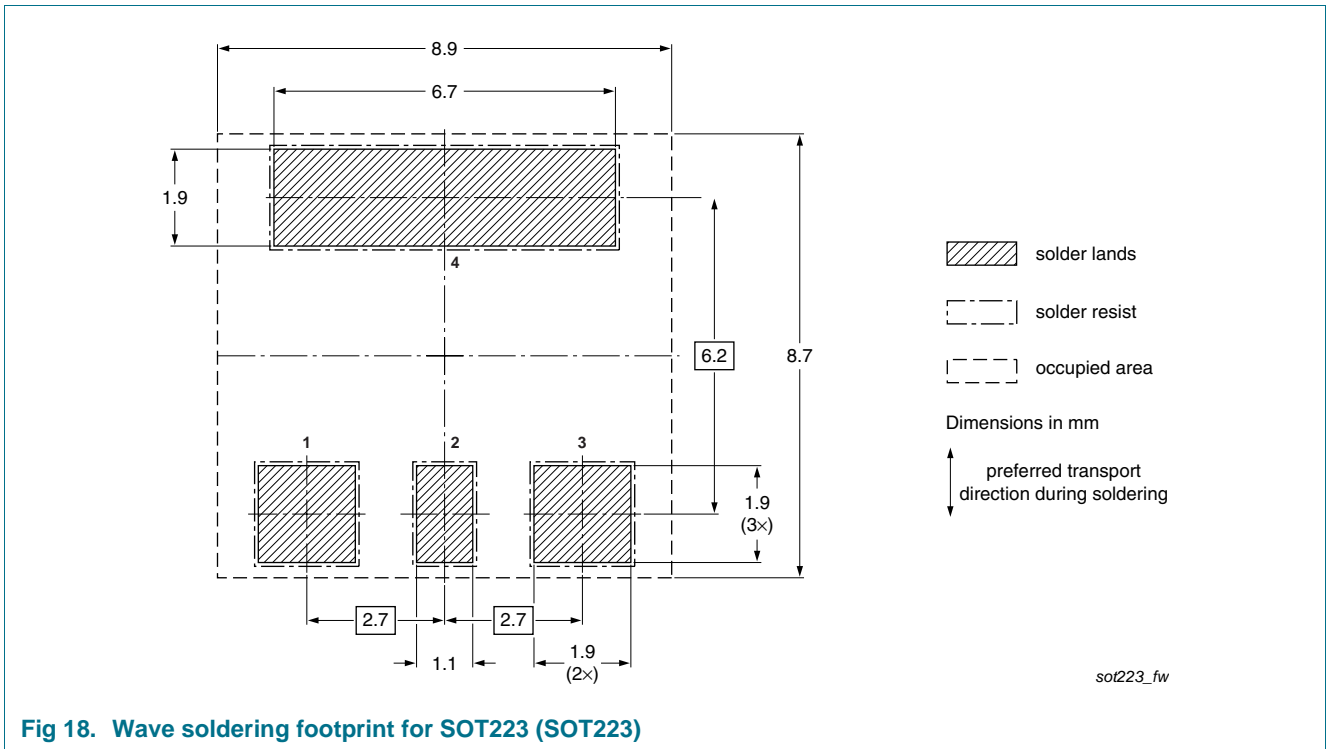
Wave soldering footprint for SOT223 (SOT223)
